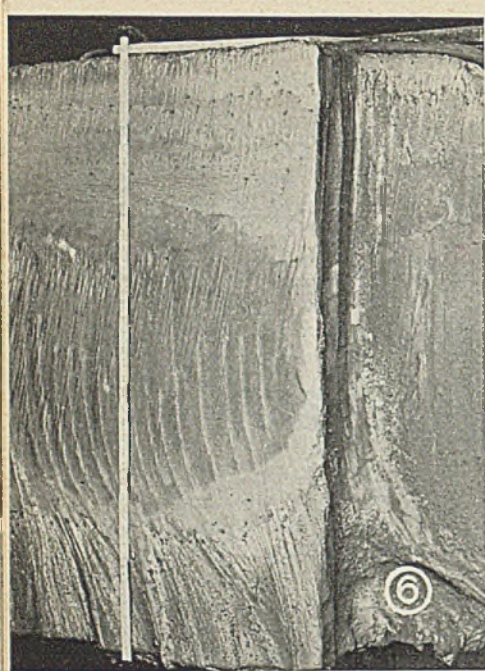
Detail of cut showing quality in cutting through 41-inch section of crankshaft
